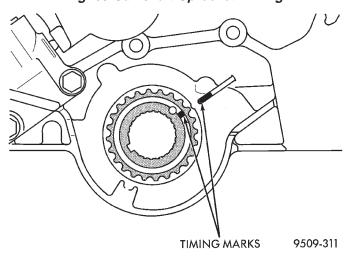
Adjusting Crankshaft Sprocket for Timing Belt
